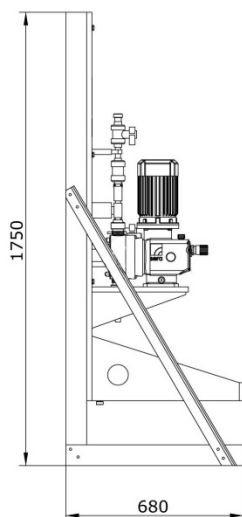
Dimensions of the CVD2 (floor mounting, steel stand)
